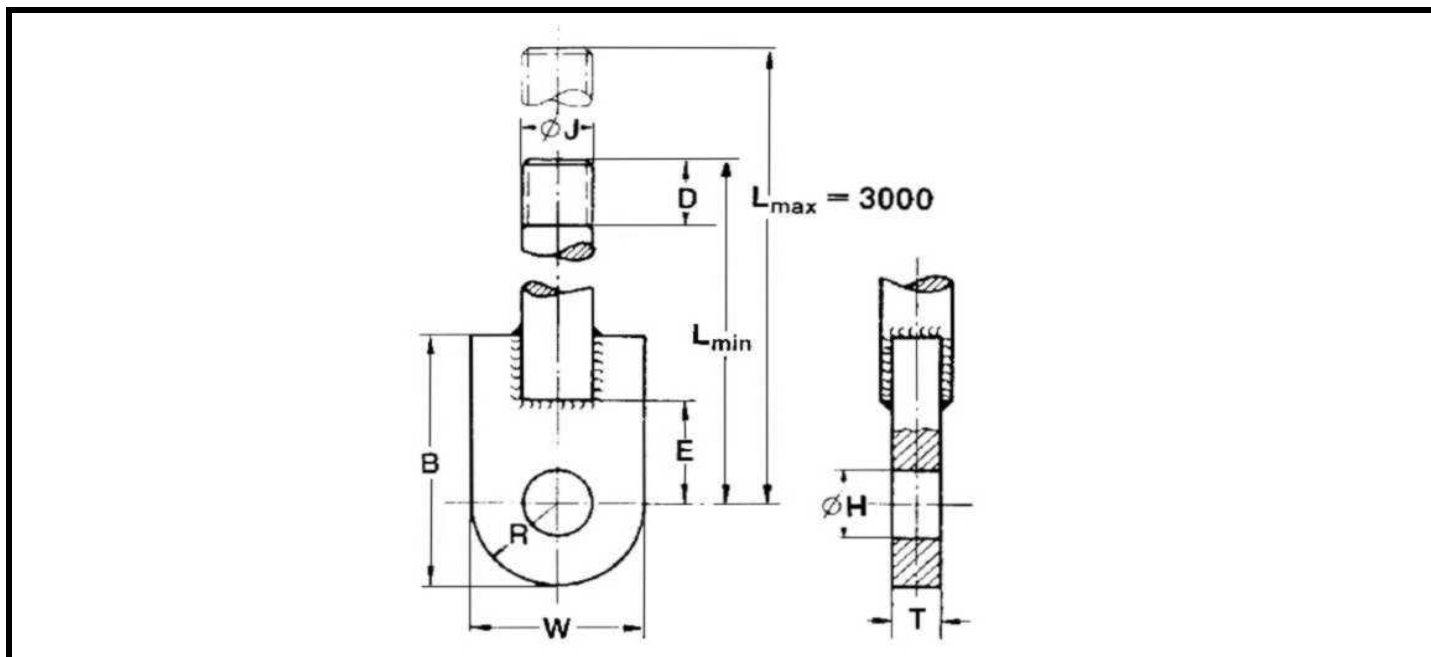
/ 141 / 146 / 253 / 254, Machined threaded Rod
